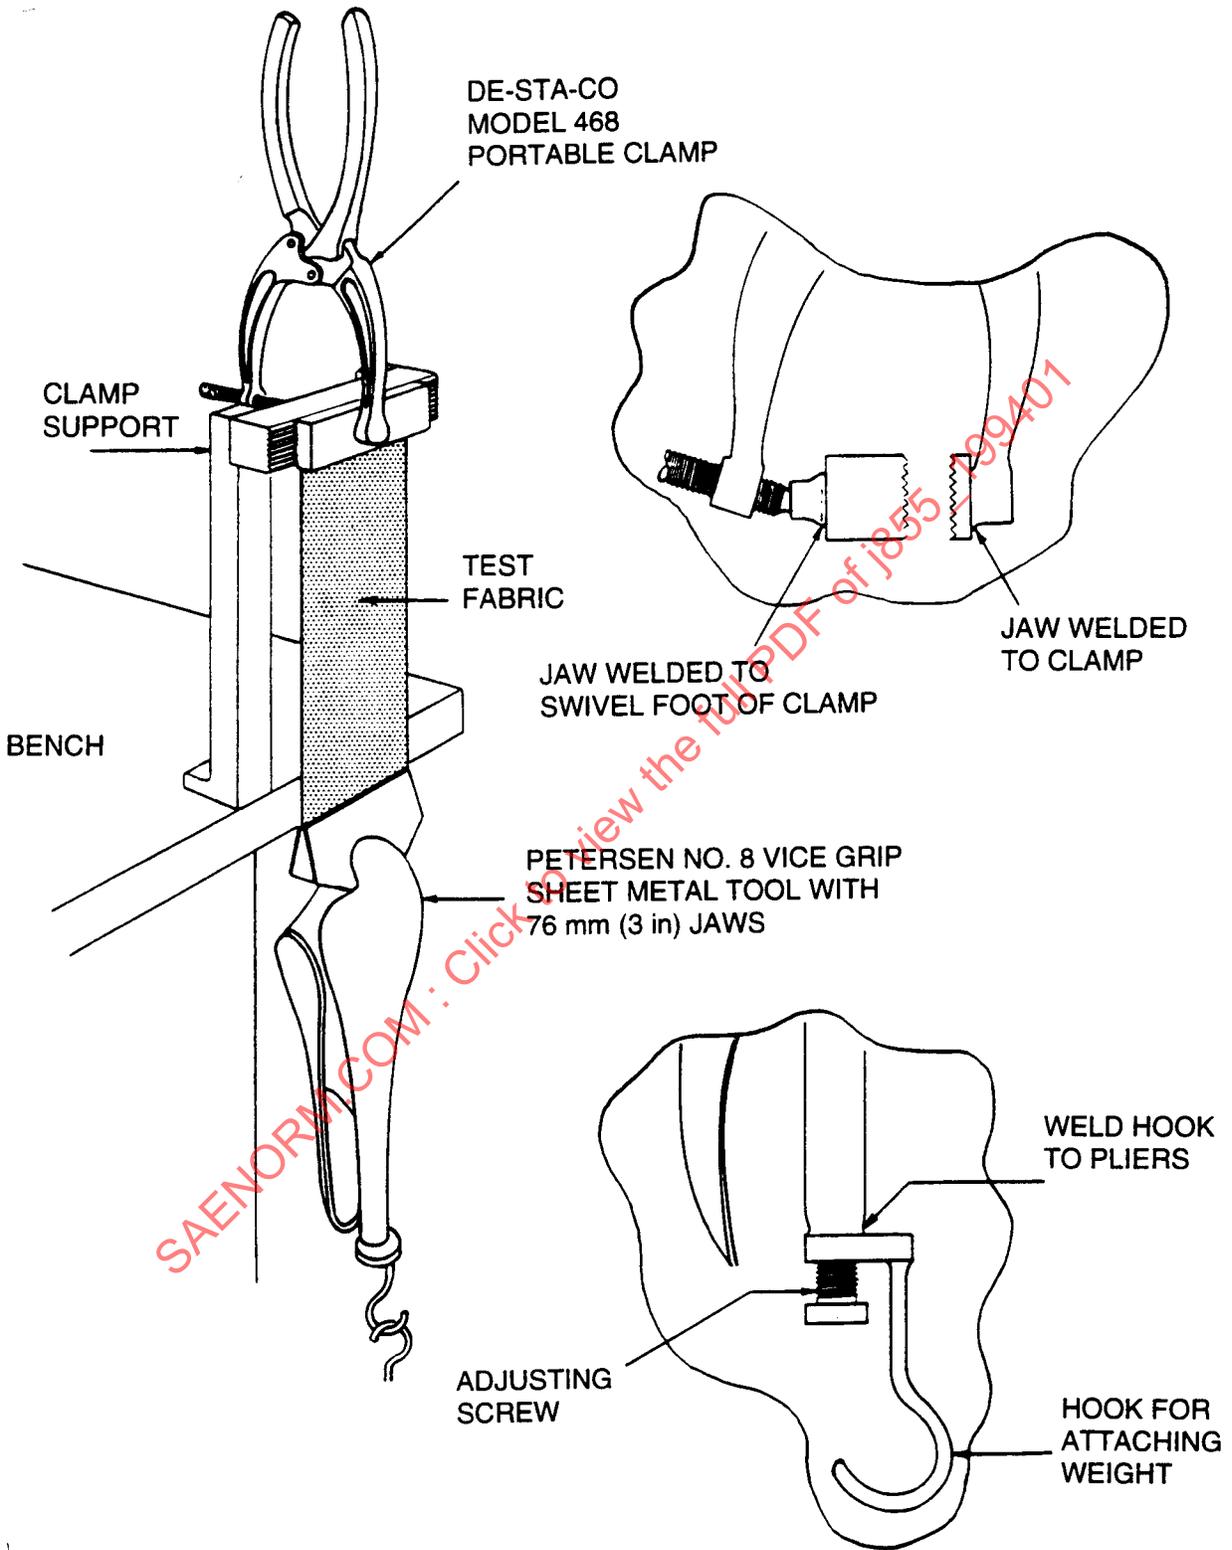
CLAMP AND FIXTURE ASSEMBLY FOR STRETCH AND SET OF TEXTILES
